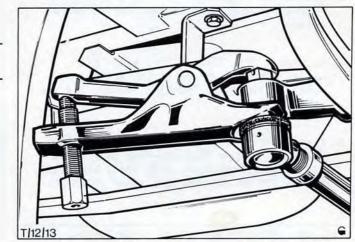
Remove track rod end from steering arm using service tool 13-006.
